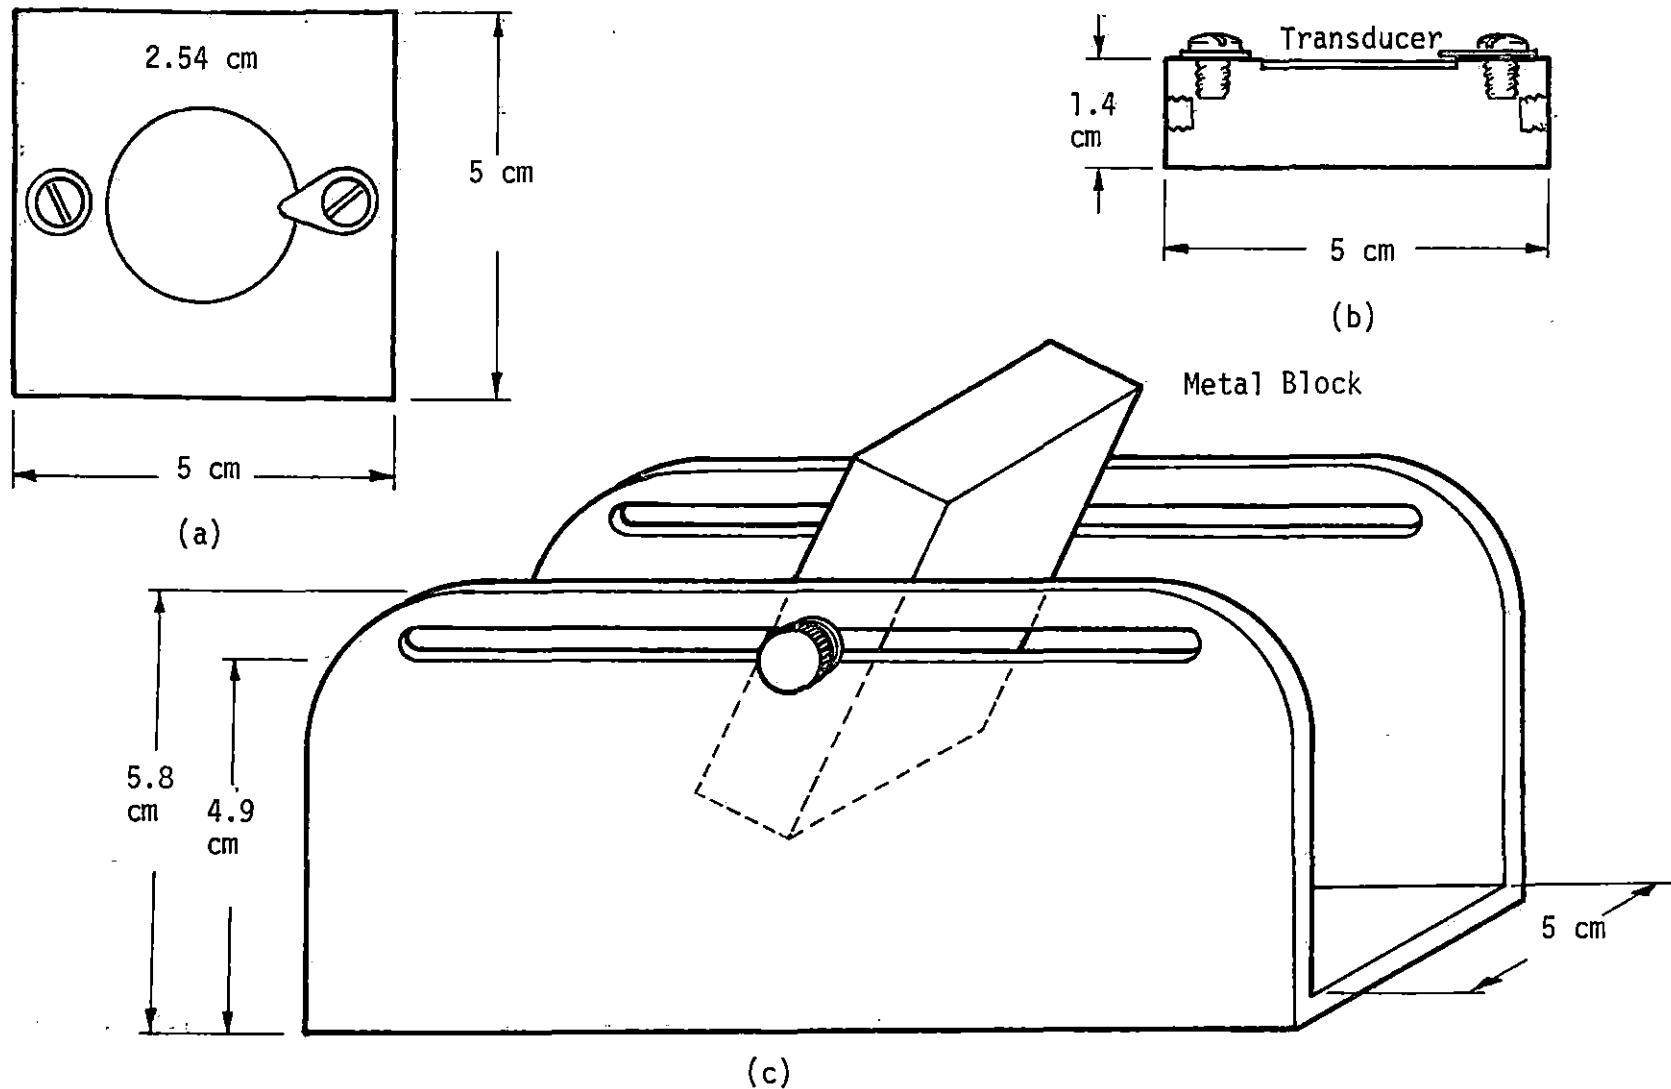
Schematic diagrams of the mounting devices. (a) top view of the stainless blocks used to hold the transducers, (b) side view of the block, (c) the stand used to hold the metal blocks
